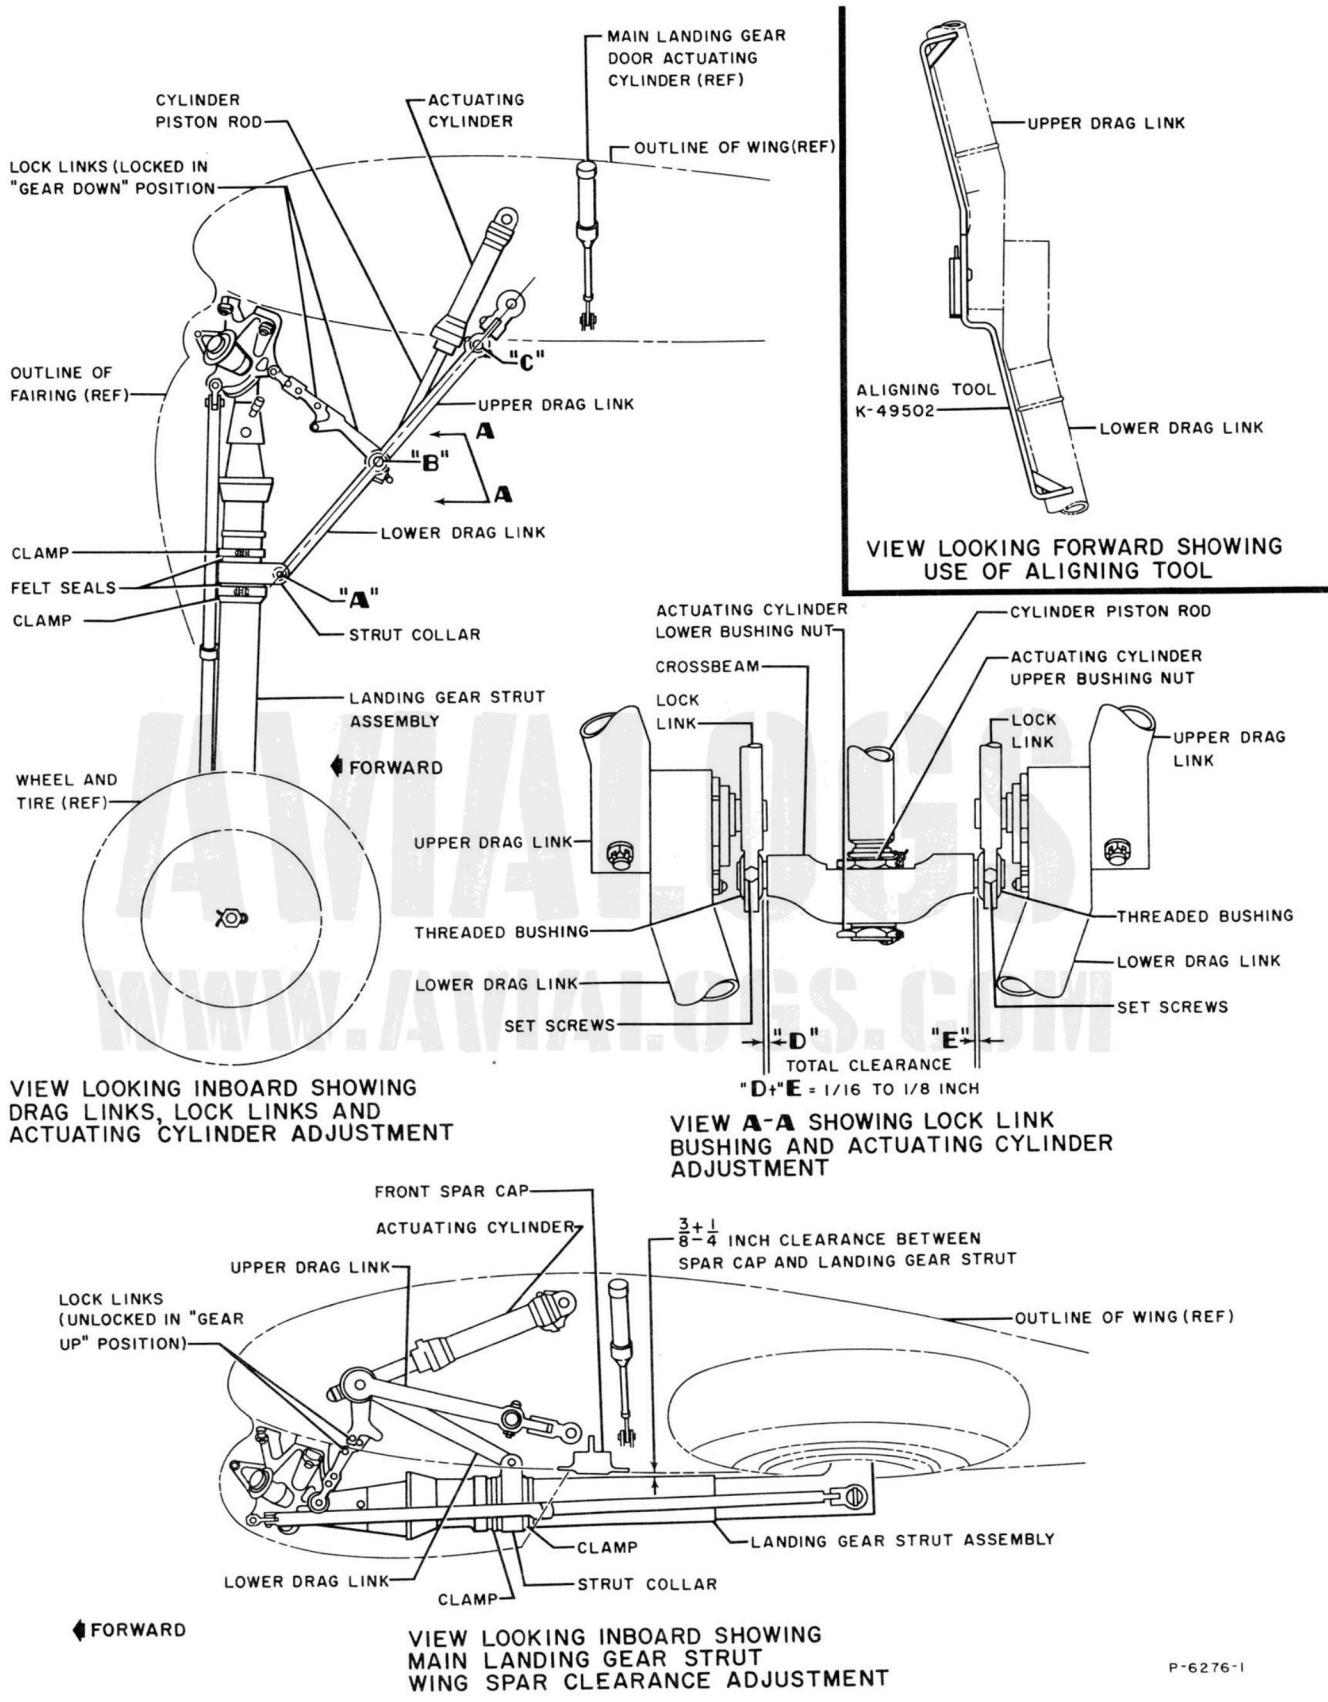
Main Landing Gear Adjustment (Sheet 2)
